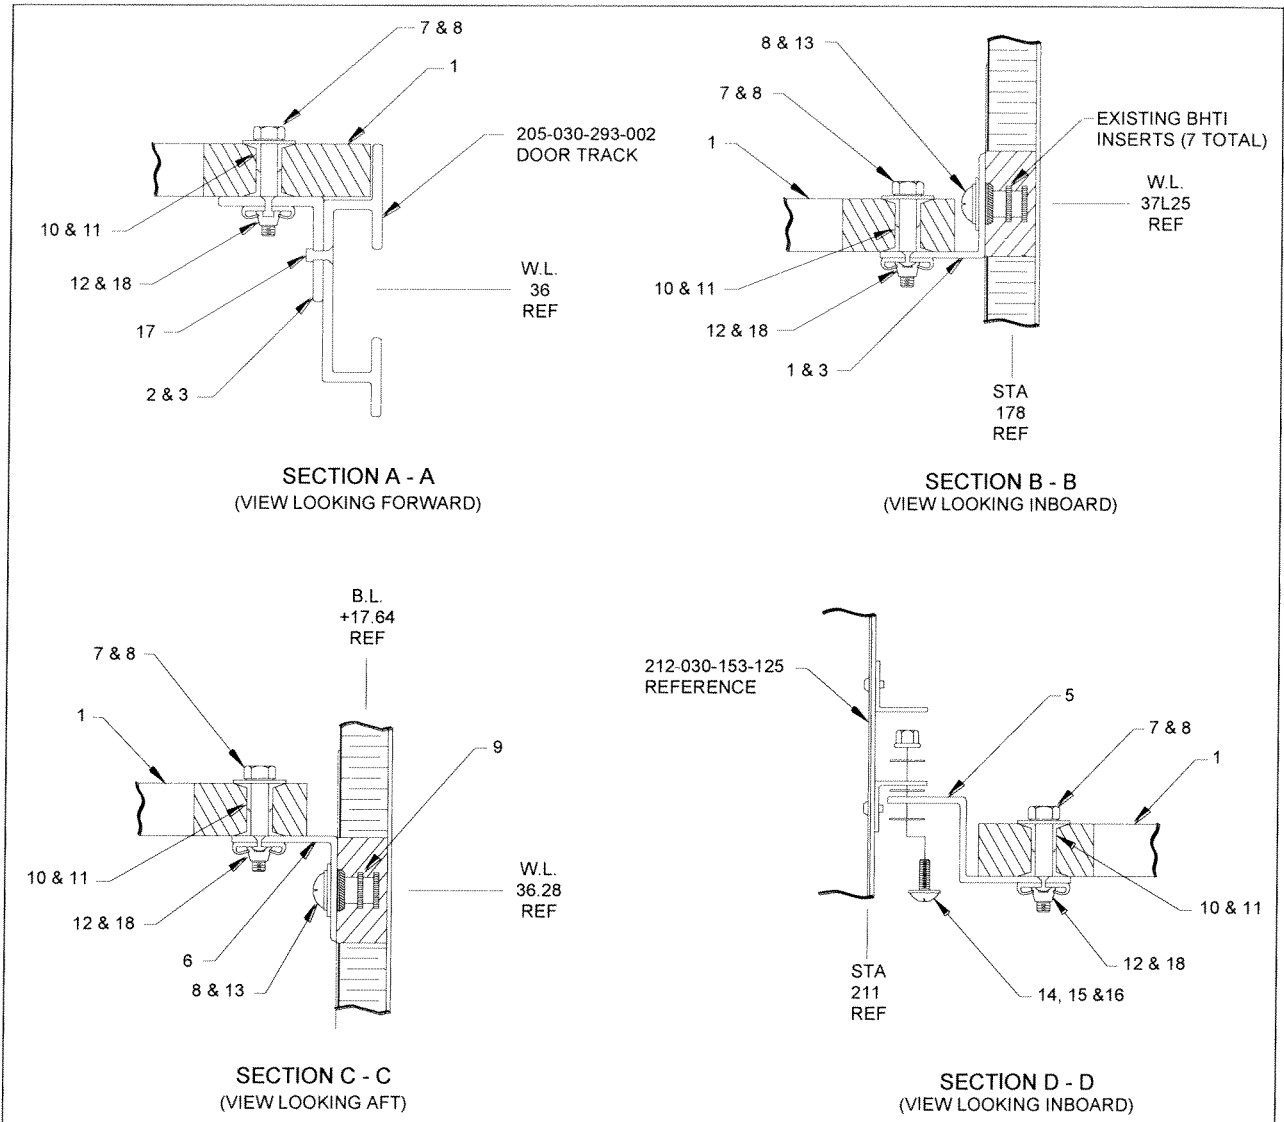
(SHEET 2 OF 3). AFT EQUIPMENT SHELF INSTALLATION
